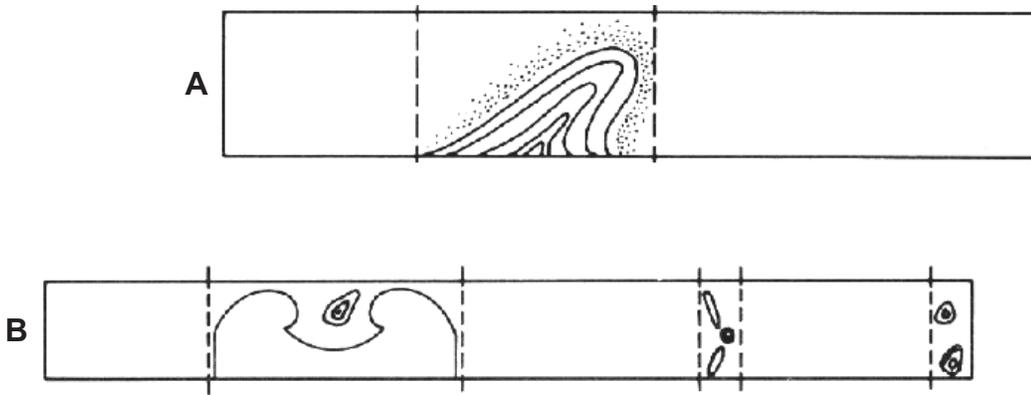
Large defects and those extending across the board width should be removed at the crosscut saw: A) Cuts should be made to remove spike knots and fuzzy grain; B) Solid line indicates patterns to be cut at band saw, thus eliminating knot.
